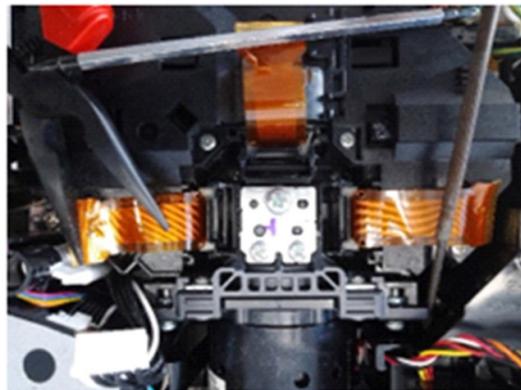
Upon removing the small coloured wires, ribbon cables, and loosening the screws, followed by detaching the green circuit board, we observed three HTPS TFT-LCD contact block adapters, each connected to a ribbon cable.
